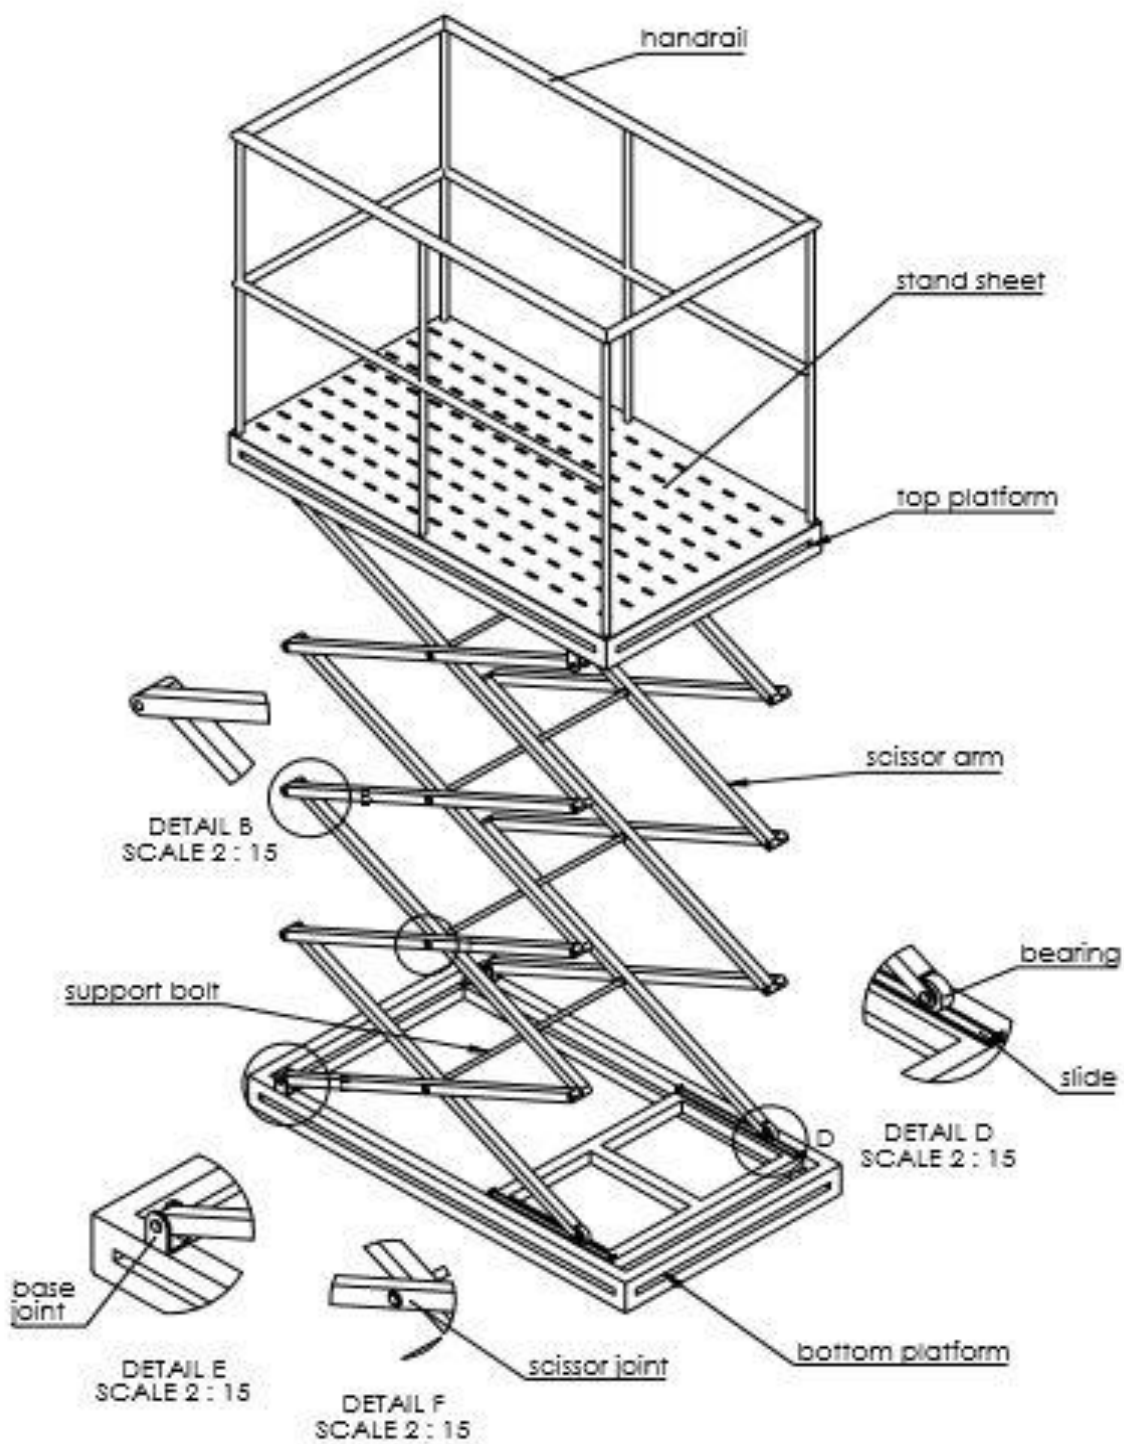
(Mechanical Assembly Sketch of Hydraulic Scissor Lift)
